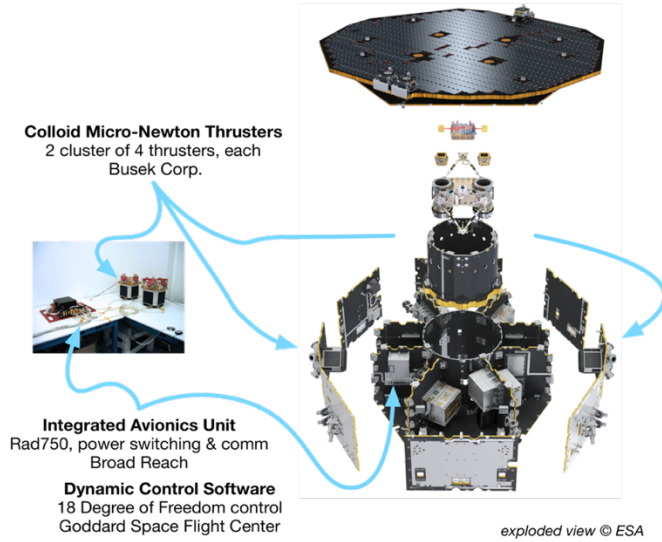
Exploded view of the LISA Pathfinder spacecraft with the ST7 DRS payload.
